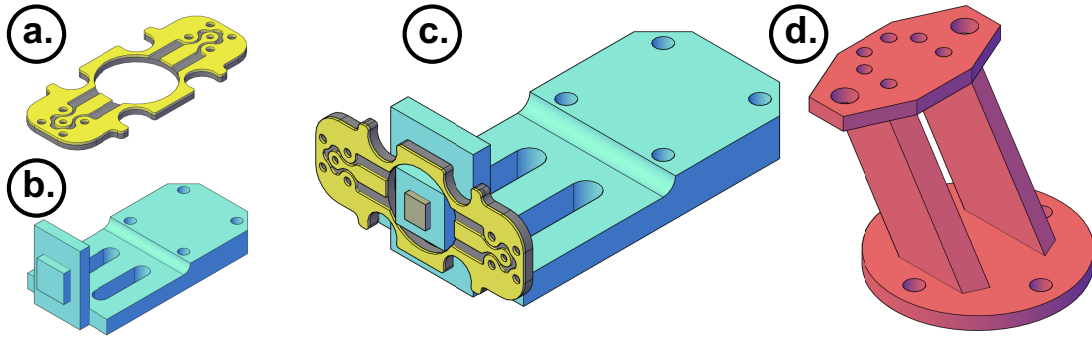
Custom-built Sample Mount, Spacer and PCB for Cryogenic System. (a) Printed Circuit Board (PCB) is designed to be able to mount right next to the diamond sample and have two available channels for signals coming in and out with the command ground. (b) Sample mount which will be installed on the top of the attocube stage. (c) A diamond sample, PCB and sample mount are all put together. (d) A  $54^\circ$ -angled spacer. Both the sample mount and spacer are made of oxygen-free high-conductivity (OFHC) copper and are gold-plated to prevent oxidation.
